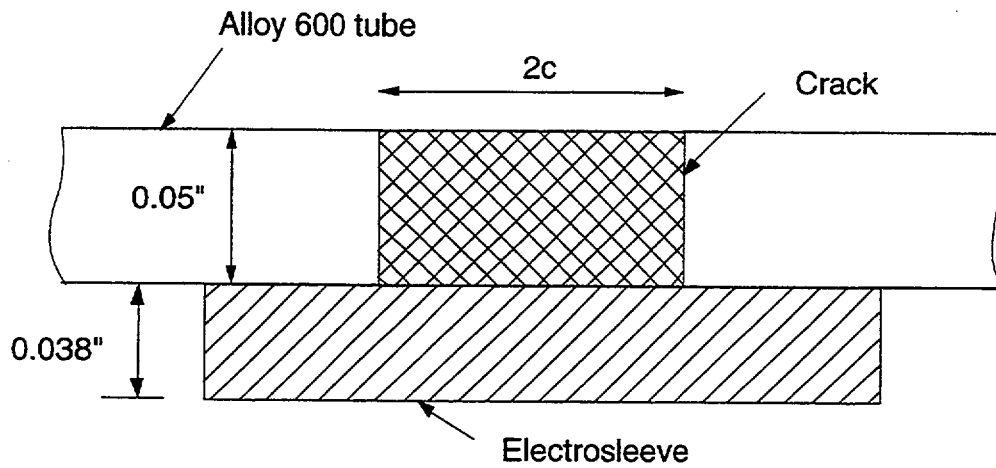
Reference geometry for Electro sleeved steam generator tube with an axial crack.
